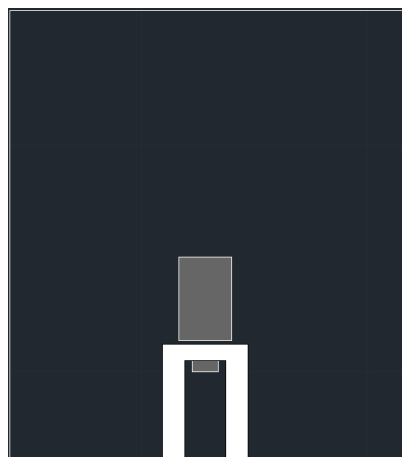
Applying the Solder Paste to the 2 Points on the PCB Surface
